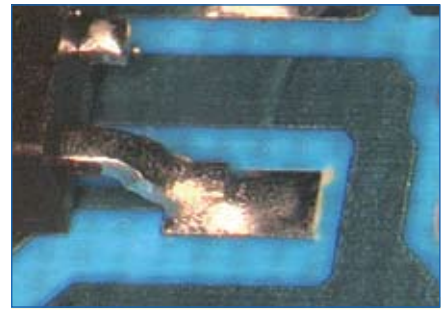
A DPAK package wave soldered with tin/copper/nickel alloy onto an OSP coated printed board.
